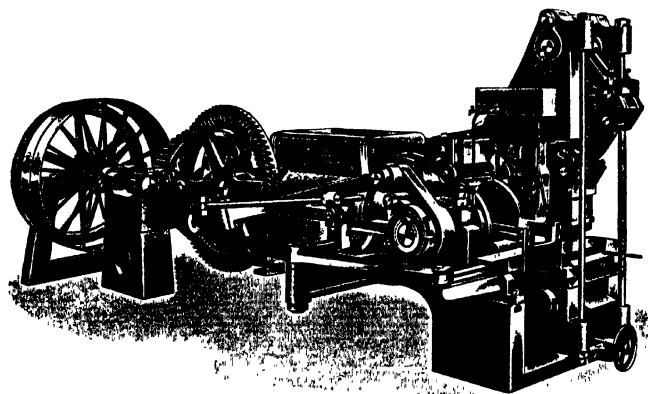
Stiff-plastic brick machine with clot-moulds on cylinder.
